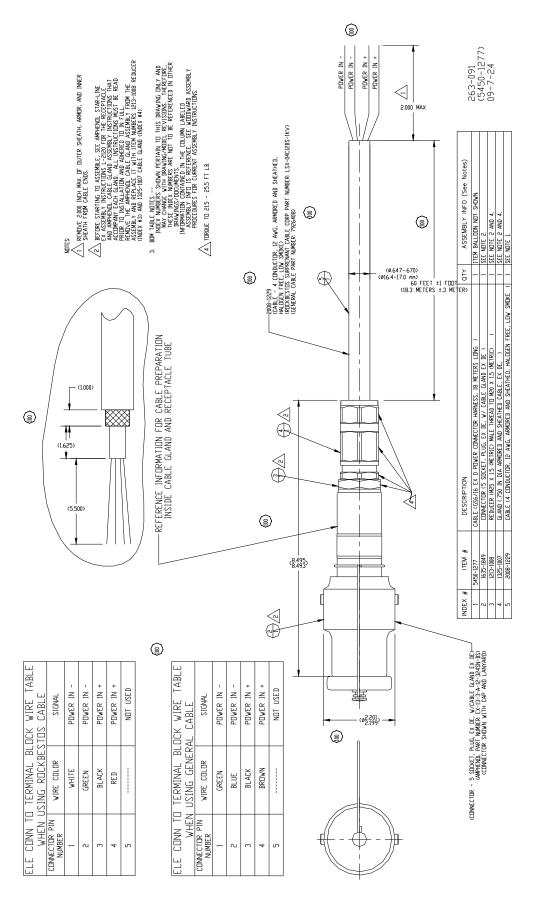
Installation Drawing, GS6/16 EX D Power Connector harness
